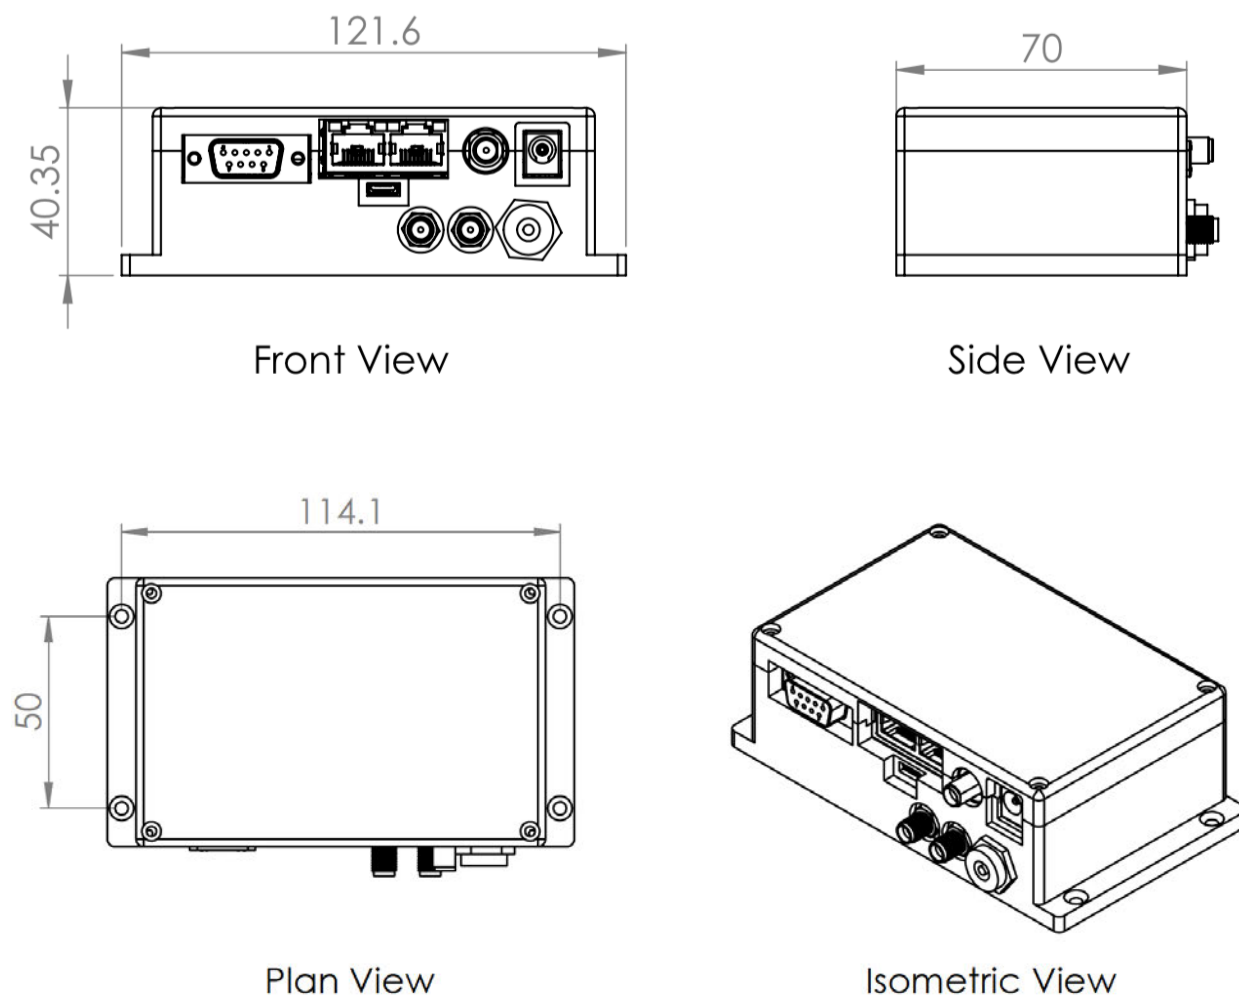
Dimensional drawings of RF Spectrometer acquisition unit. All dimensions are in mm.
